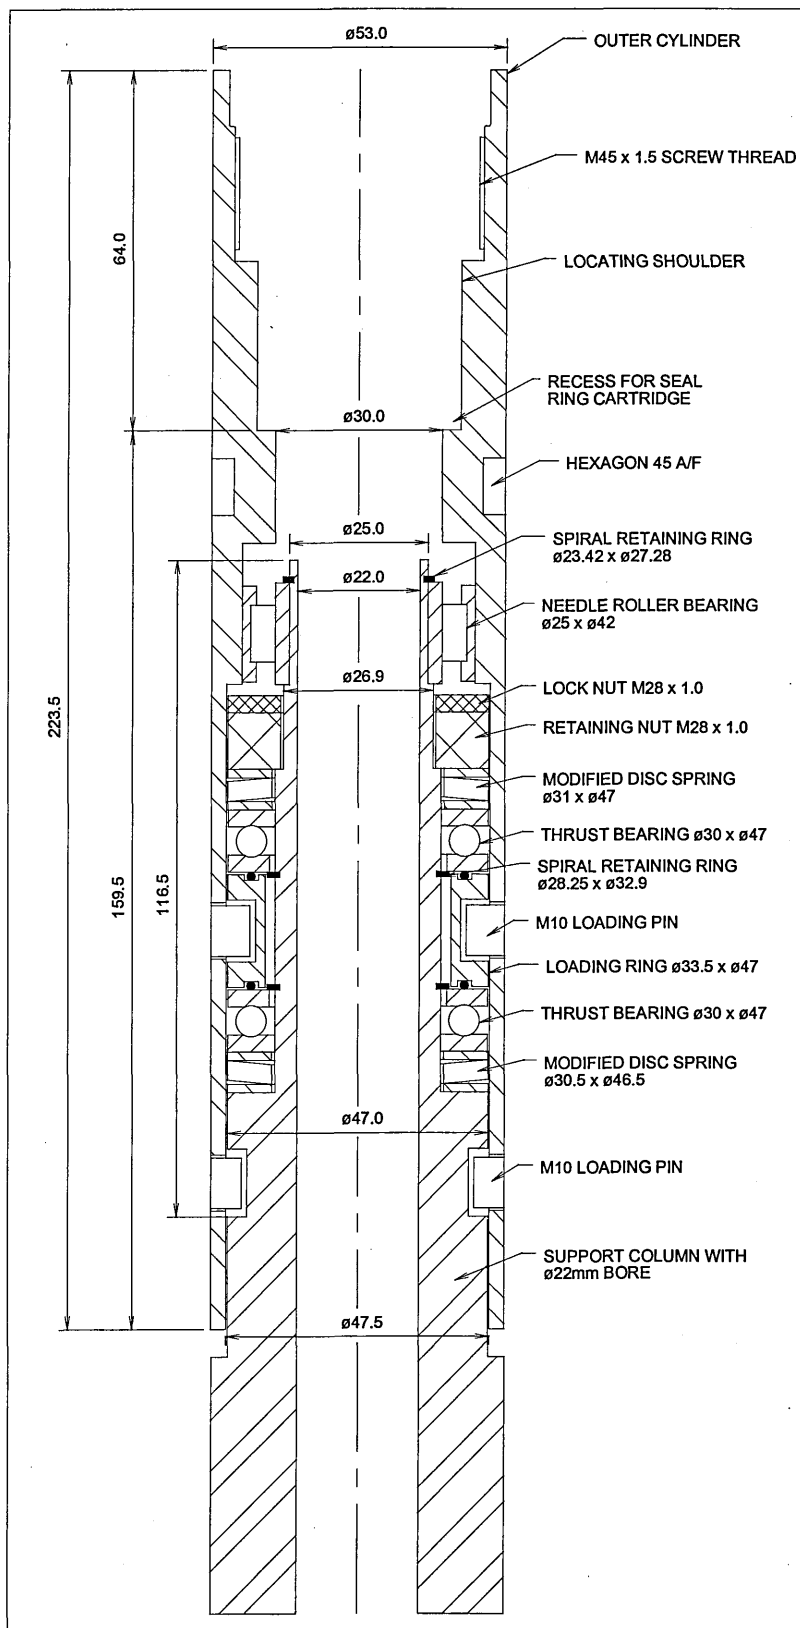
SUPPORT COLUMN BEARING ASSEMBLY
